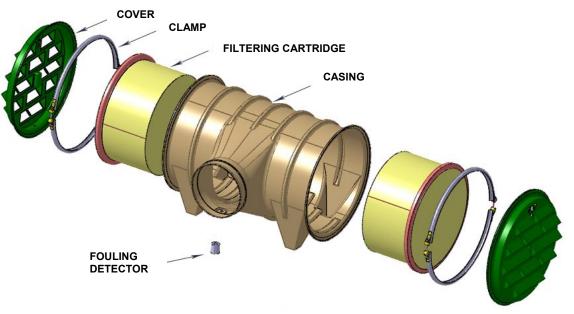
Exploded view of Kohler High Flow two-cartridge air filter
